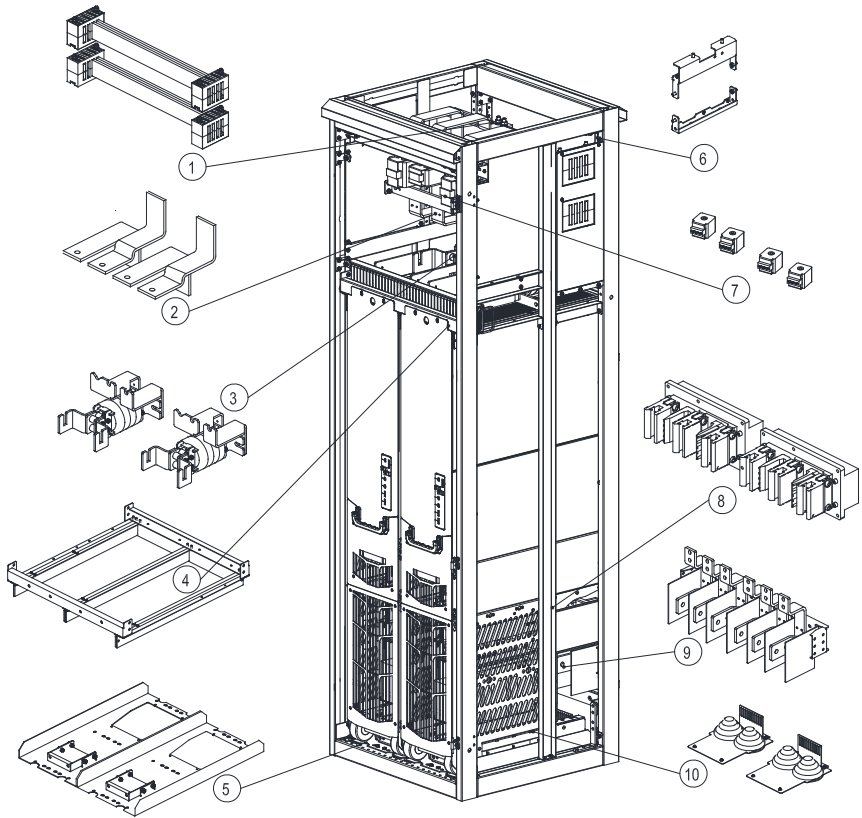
H8-600 mm Cabinet Installation (fuse only)
